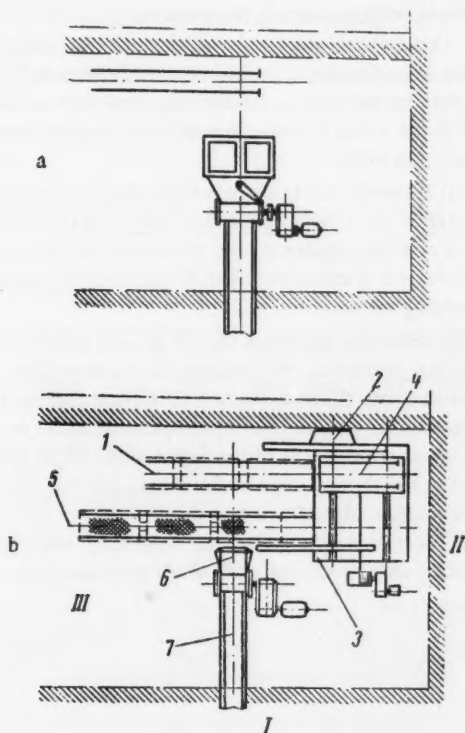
Collection of cut-off sections: a) existing; b) planned; 1) track for empty wagons; 2) and 3) pushers; 4) moving platform with tracks; 5) track for loaded wagons; 6) chute for section conveyor; 7) section conveyor. I) mill bay; II) billet store bay; III) scrap bay.
